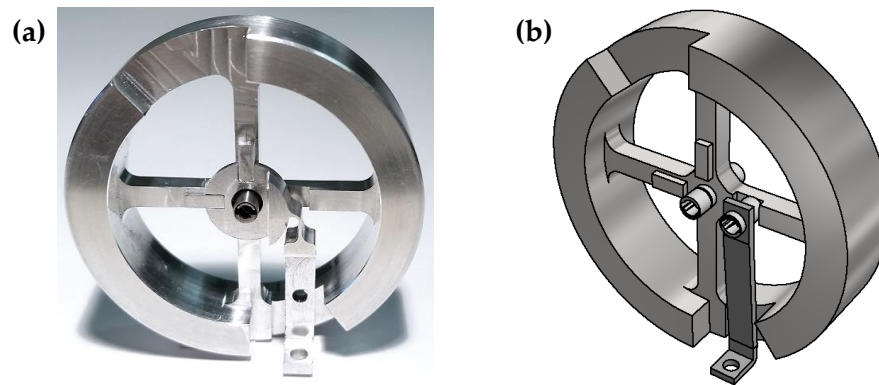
Pinned configuration flywheel elements with the two different pushing pins. Pushing pin based on the flexural hinge (a), Pushing pin design with third pivot bearing (b).
